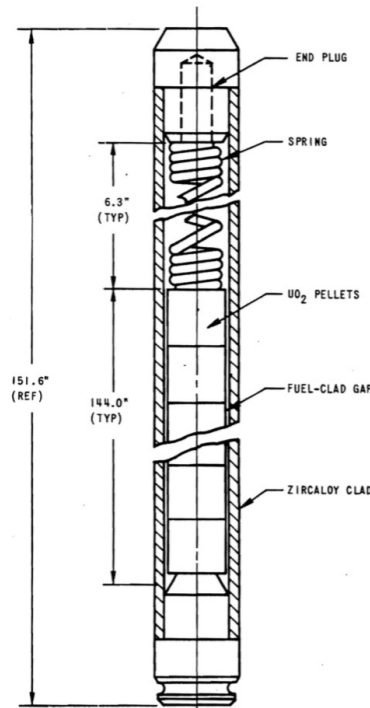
Axial arrangement of WBN1 fuel rods [13].
